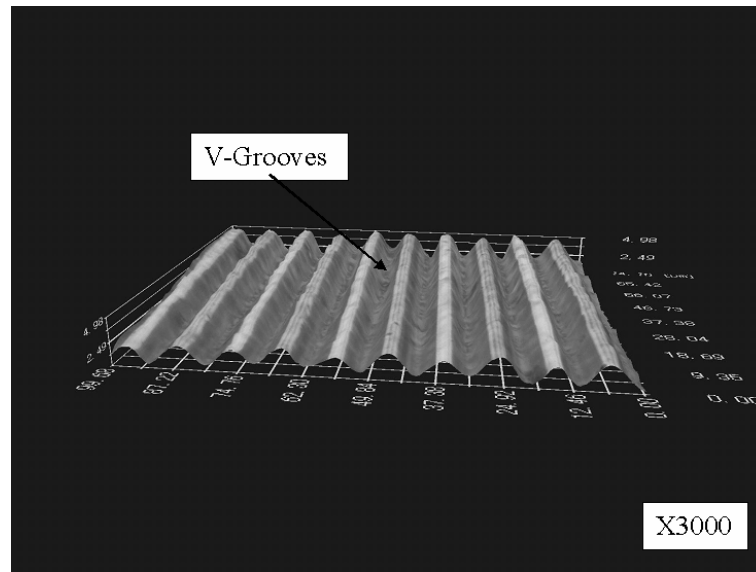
3-Dimensional Keyence image of Machined Surface
